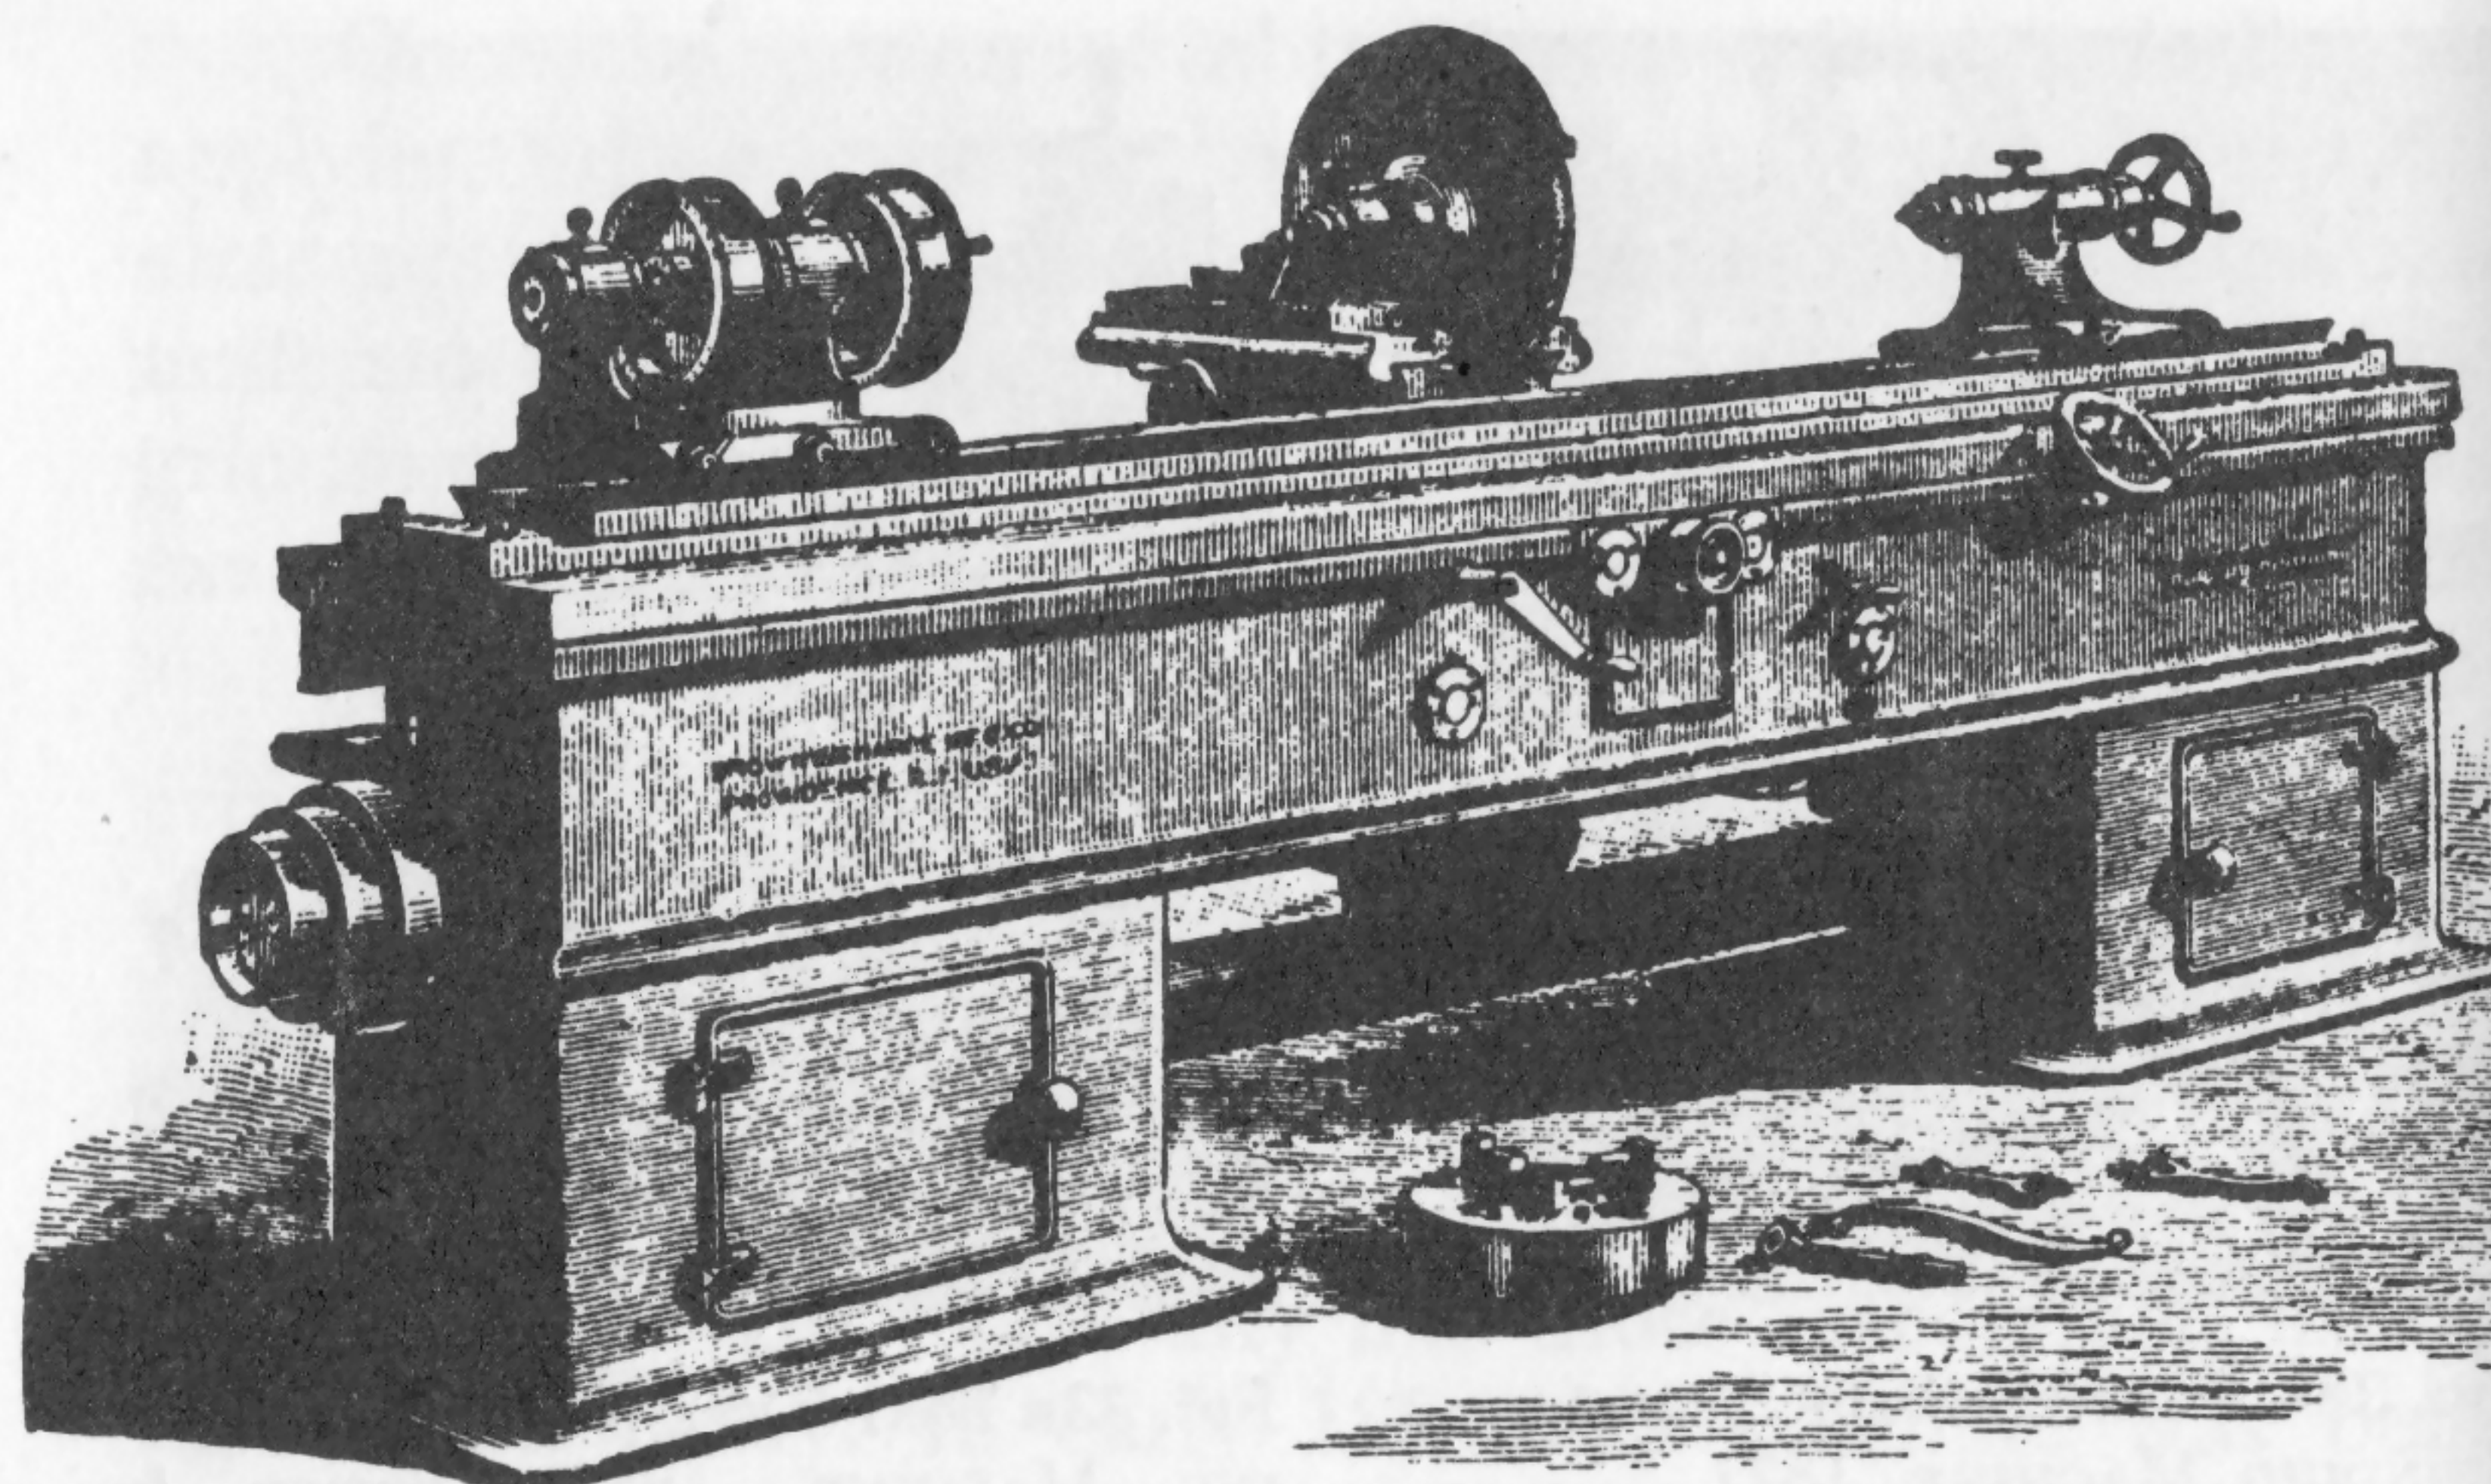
LARGE UNIVERSAL GRINDER, 1883 (Brown & Sharpe)
